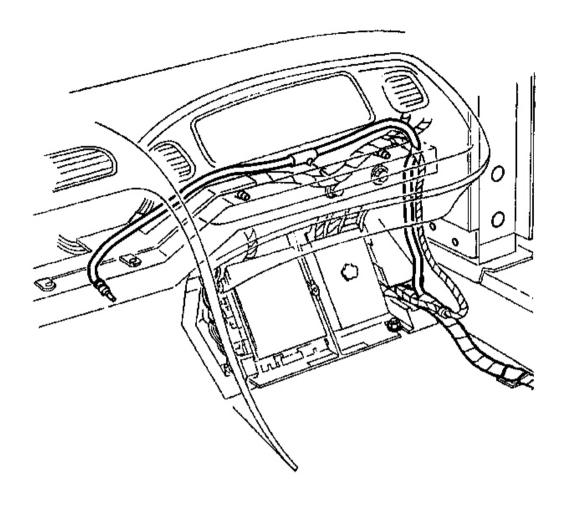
Headlamp Circuit Breaker To IP Electrical Center Courtesy of GENERAL MOTORS CORP.
